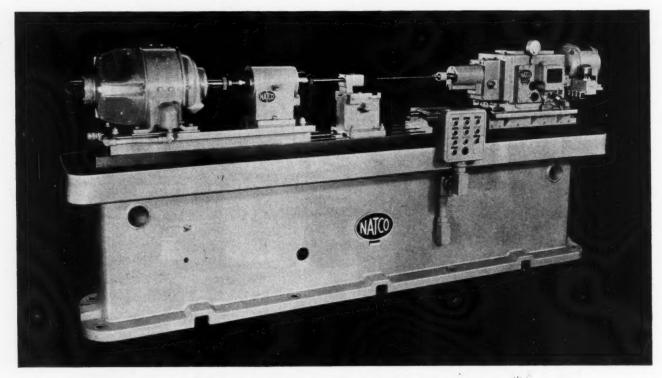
Natco "Holeunit' Deep-hole Drilling Machine
